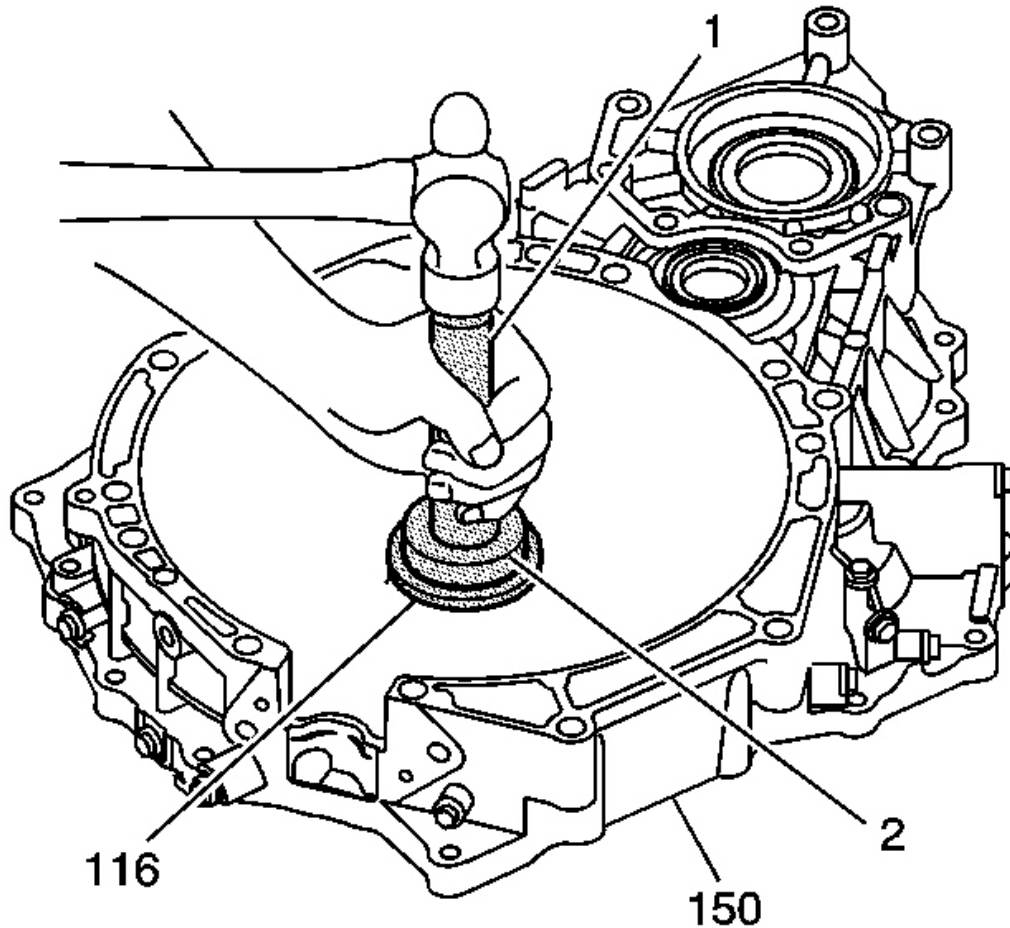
Installing The Torque Converter Fluid Seal Using DT 46428 & EN 46342
